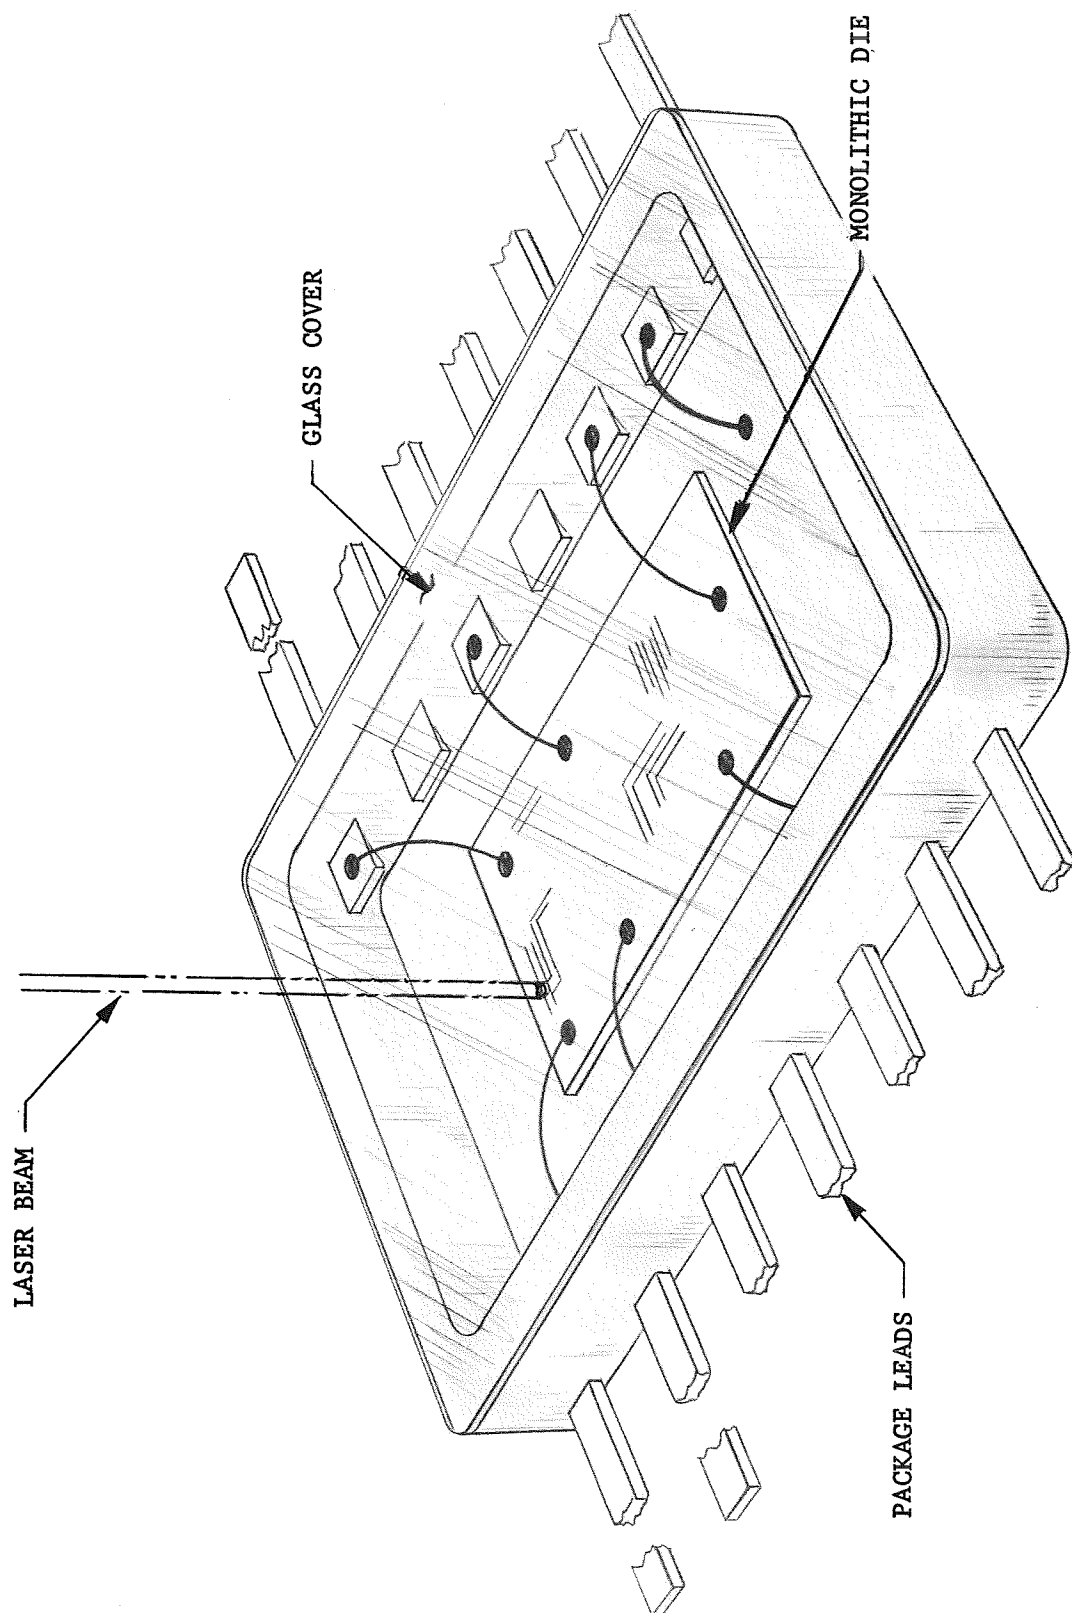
Laser Resistor Adjustment Through Glass Topped Package
